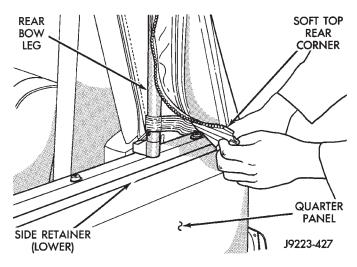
Detaching Rear Corner Side (Lower) Retainer
